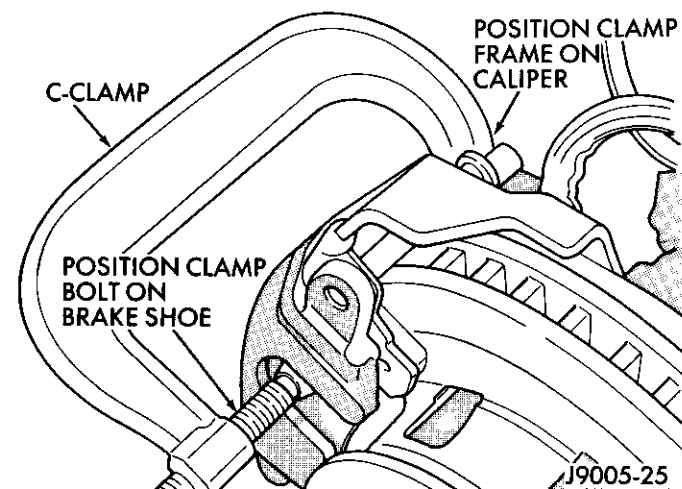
Bottoming Caliper Piston With C-Clamp—Typical
